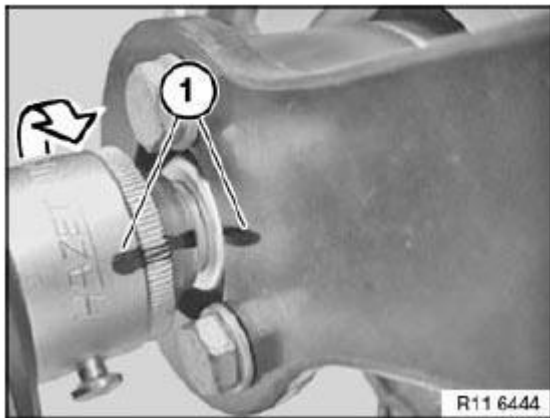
Identifying Paint Mark Of Torsion Angle Tightening And Tool
